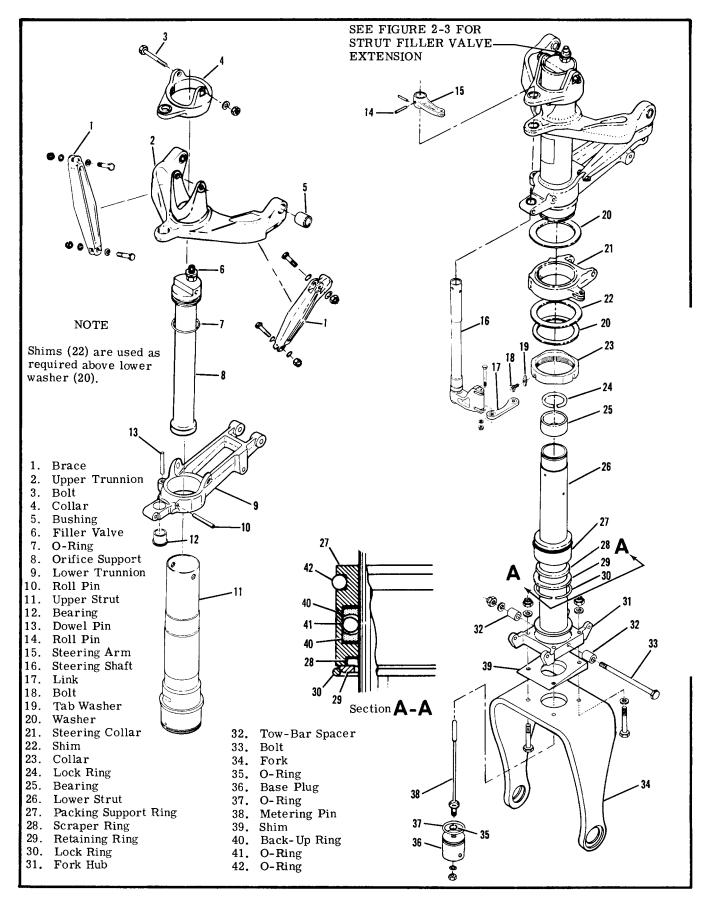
Heavy-Duty Nose Gear Shock Strut
